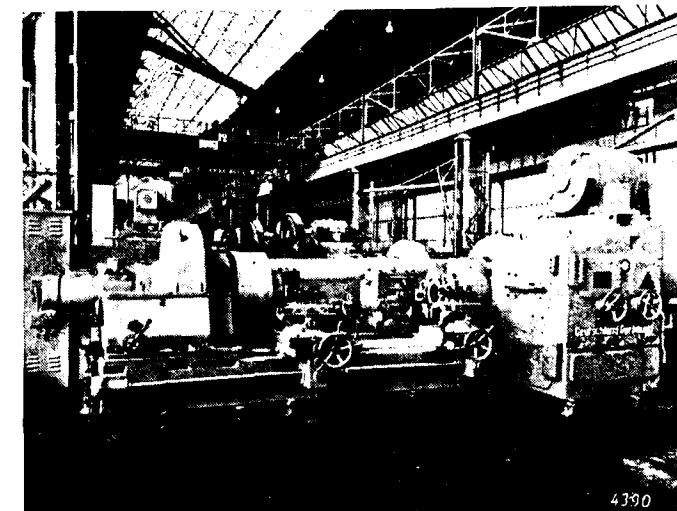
MFD Wheel lathe for wheel sets with outside journals.
